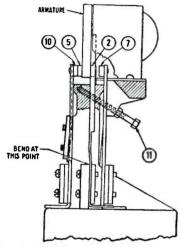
(a) Showing the vibrator and adjustments. The top view is shown below
